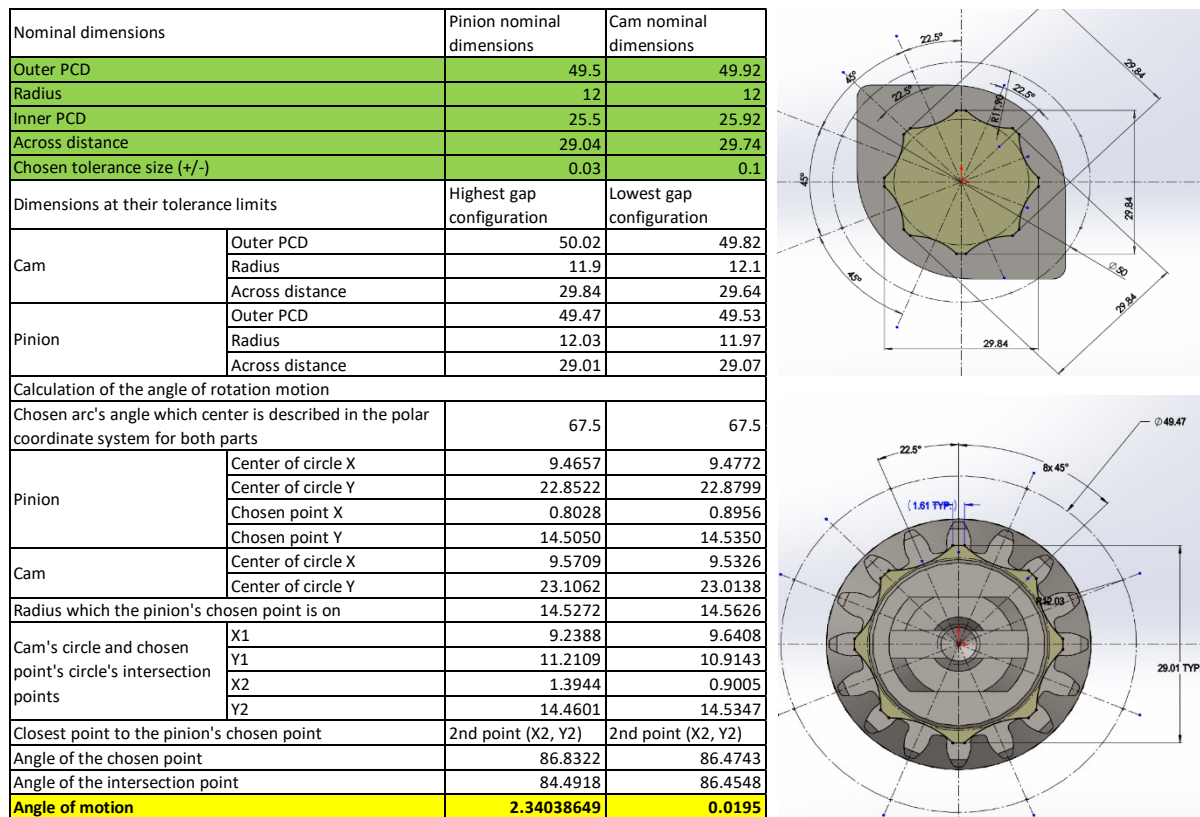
tool developed for the definition of the best tolerances of pinion-cam connection.
